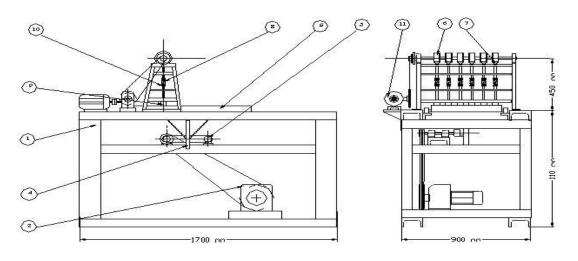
General lay out of the wear testing M/C: (1) machine frame; (2) 2.2 kW motor; (3) chain drive mechanism; (4) Ubeam guide; (5) carriage; (6) eccentric cam; (7) cam follower; (8) spring; (9) pin holder; (10) movable spring seat; (11) 0.74 kW motor.
